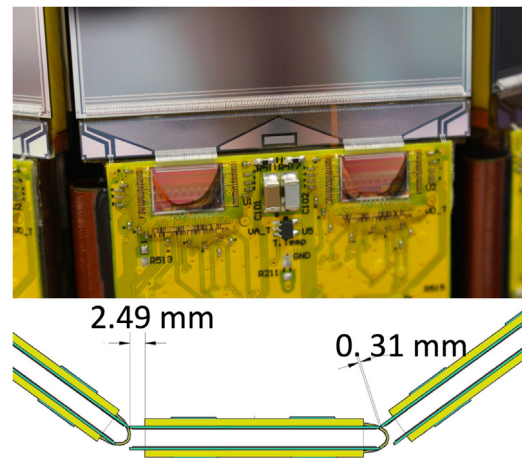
A close-up photograph of adjacent modules on the barrel (top). Schematic layout of adjacent modules (bottom).
